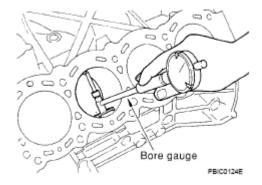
Identifying Bore Gauge Courtesy of NISSAN MOTOR CO., U.S.A.
